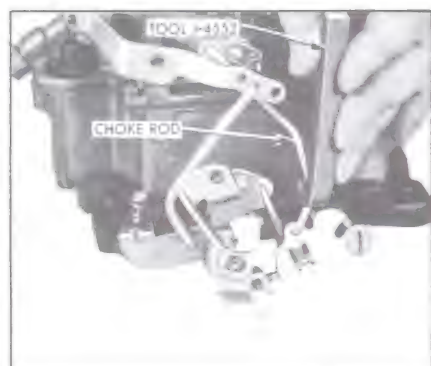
Adjusting Fast Idle Cam choke trip lever on end of choke shaft with "RP" out and tighten attaching screw. See Figure 3-50.
